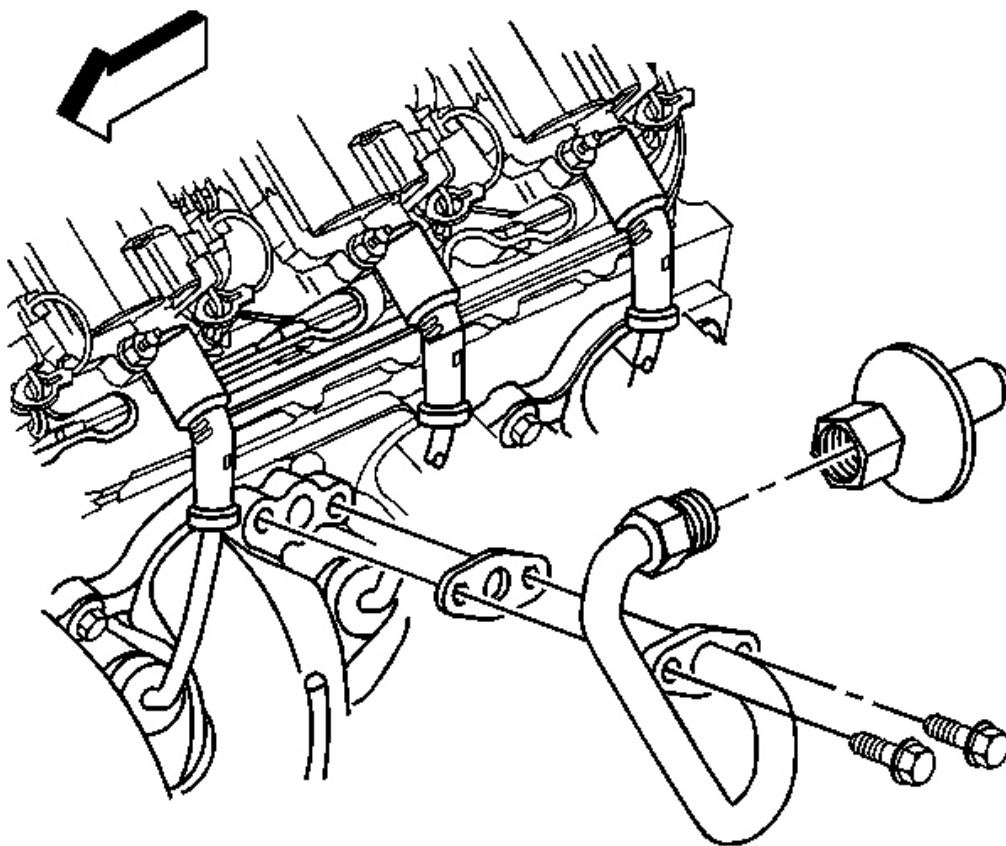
AIR Pipe Bolts, Exhaust Manifold & Bolts
